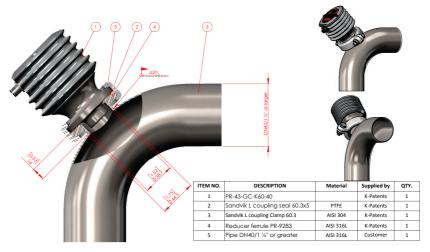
Mounting PR-43-GC-K60 with reducer ferrule
